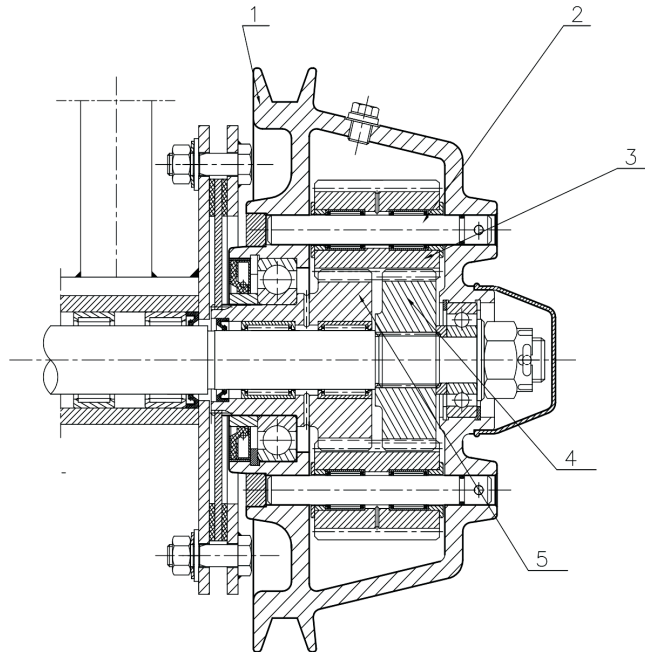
Project of planetary gear with simplifying technology, 1) carrier-housing, 2) satellite bolts, 3) satellite wheels z_2, z_3 , 4) sun gear z_4 , 5) central gear z_1
